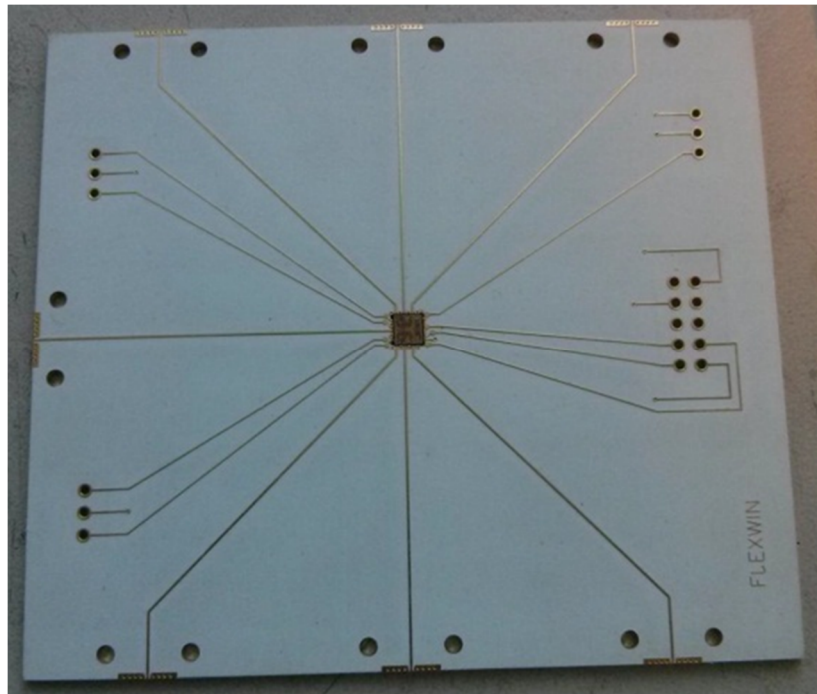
Fabricated test board prototype with multi core chip mounted.
